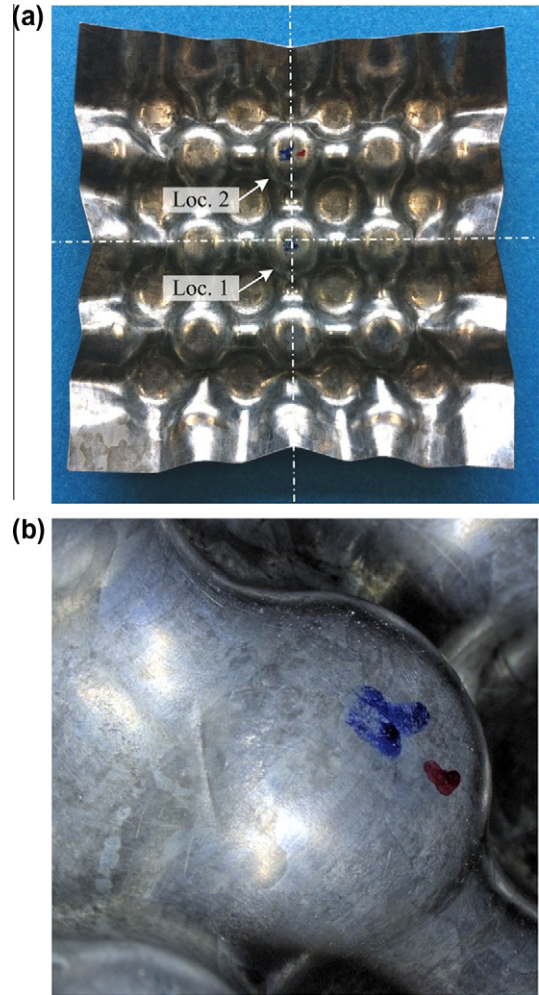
Sheet specimen after stamping all the way to fracture: (a) top view, (b) close-up of the crack observed at location #2.
